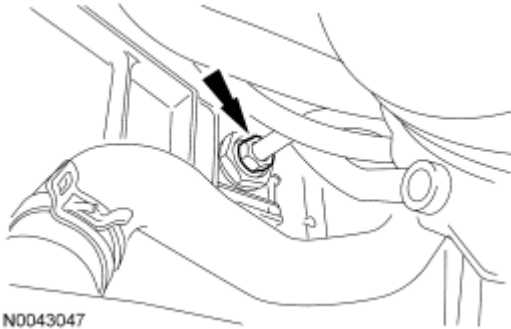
Locating Lower Transmission Fluid Cooler Tube
